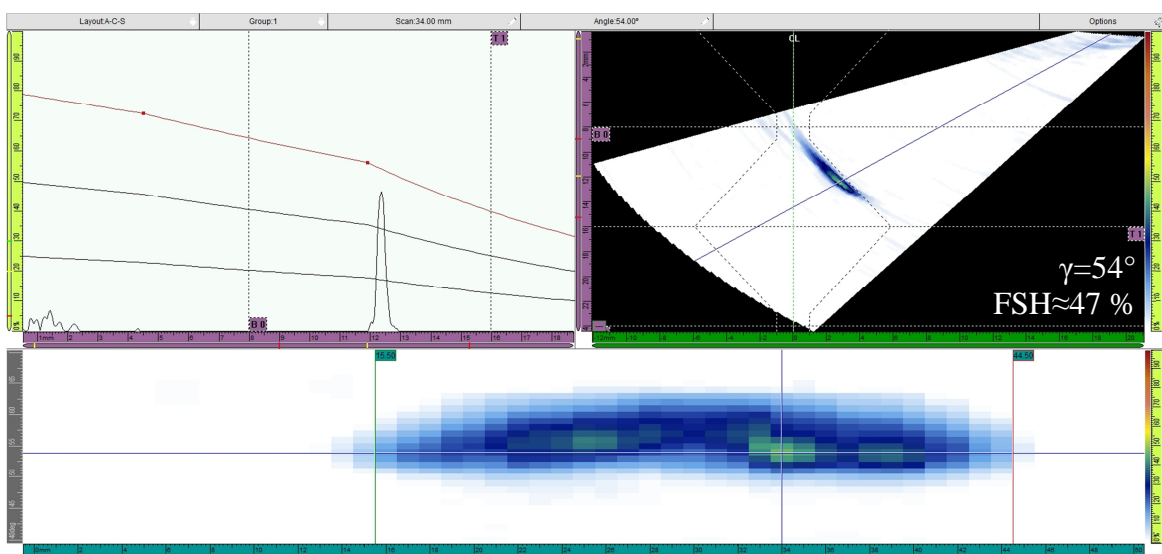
The lack of side-wall fusion on the right side of welded joint, DAC Ø3 mm (B)
